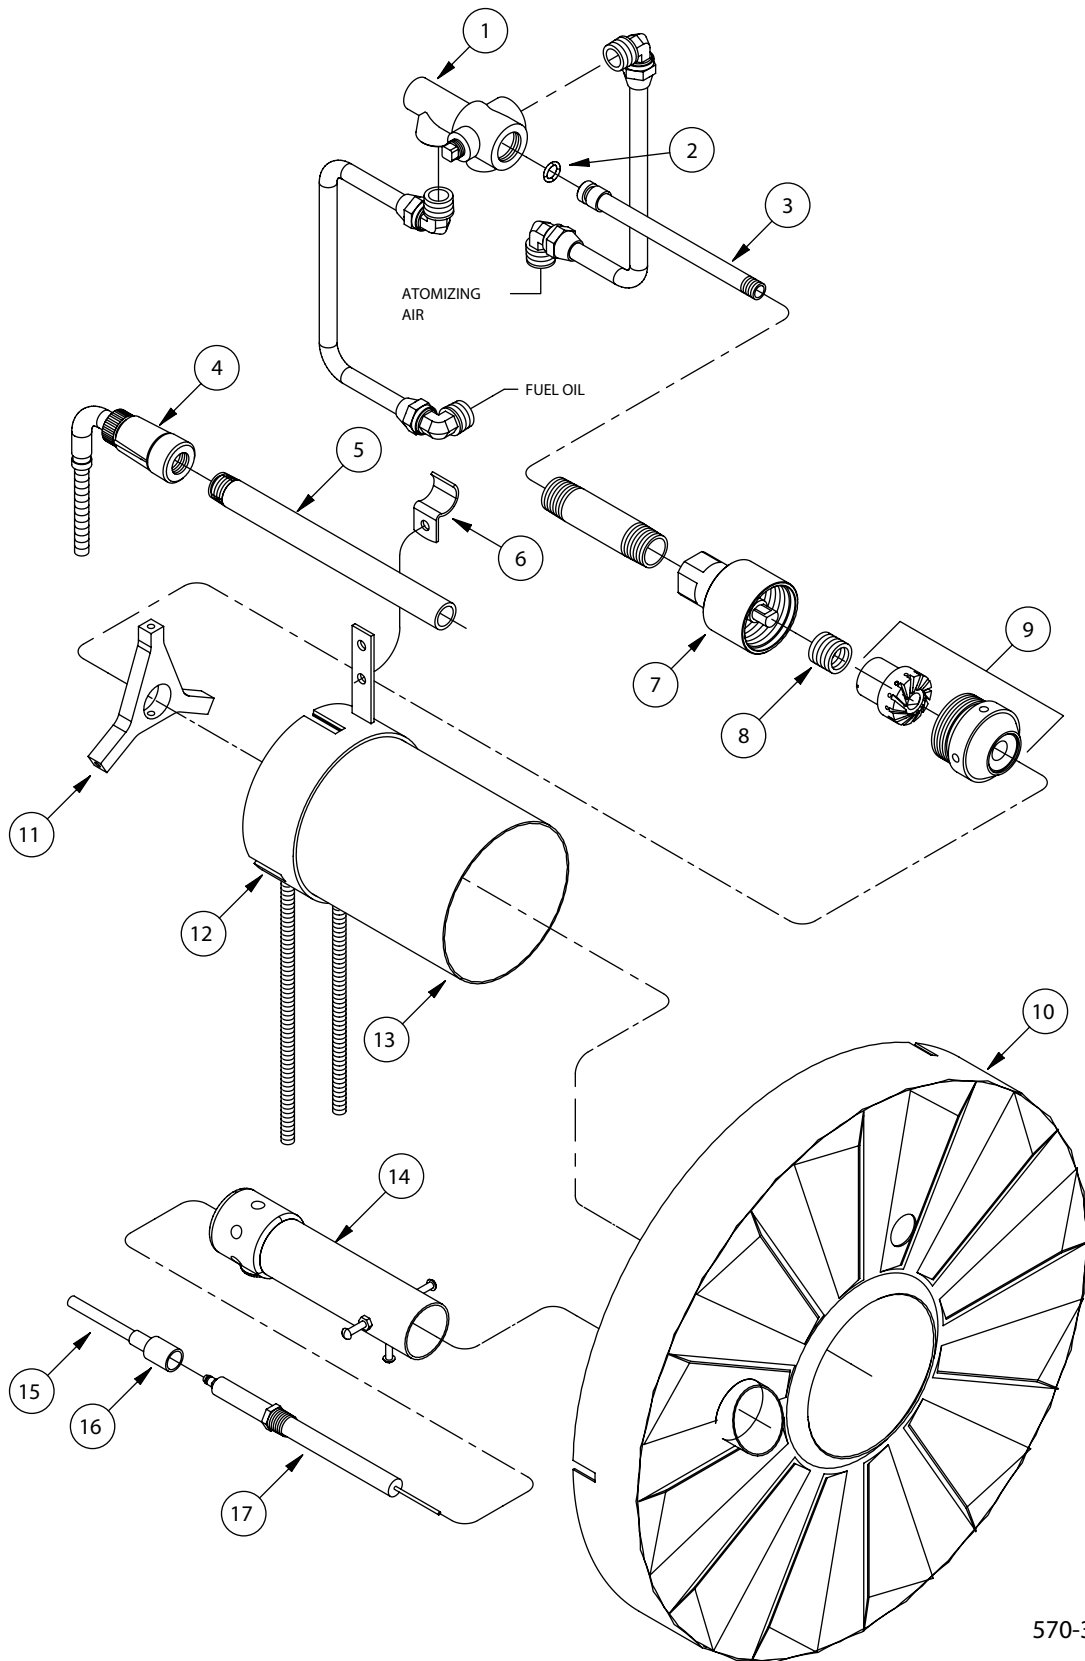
DRAWER ASSEMBLY. D84 -145
